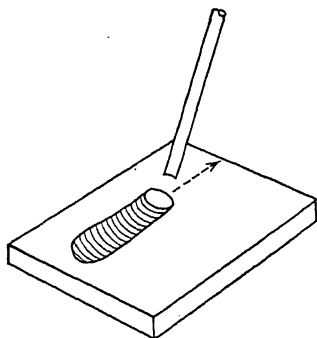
The electrode is held straight in the line of travel and pointing into the weld at a 30-deg. angle.
